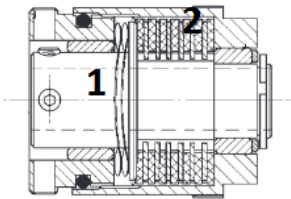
Schematic of Vari-tork 273.25.22 adjustable-friction clutch: (1) inner bearing housing the interconnecting shaft, (2) outer bearing.
